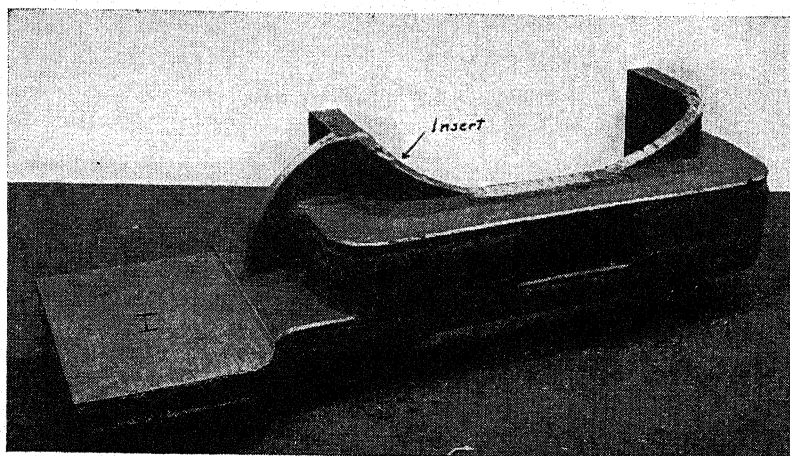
Locomotive guide yoke fabricated by arc welding of $1\frac{1}{4}$ -inch boiler plate.
